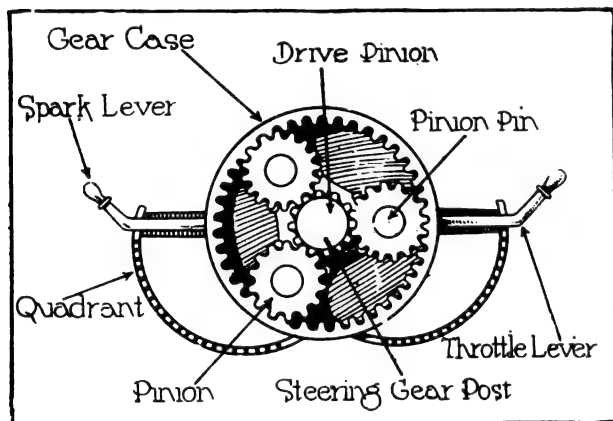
Illustrating the "Sun and Planet" Gears Utilised in the Steering Gear Assembly of the Ford Car.
